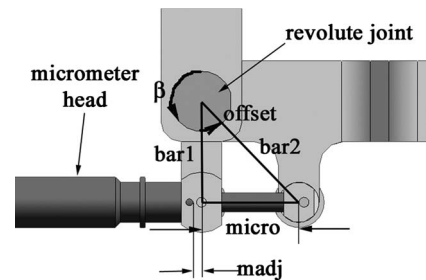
Illustration of the three-bar linkage and necessary parameters for controlling the rotation about the revolute joint. The micrometer varied the distance “micro” to control rotation. Additional revolute joints, which connected the micrometer to bar1 and bar2, utilized brass bushings and a lock nut compression design to minimize play from machining tolerances. The micrometer was installed using set screws and created the third link with a line contact (i.e., end of micrometer contacted cylindrical surface) to ensure proper micrometer measurement. Lastly, the three-bar linkage was energized with a spring (not shown for clarity) across the micrometer to eliminate play.
